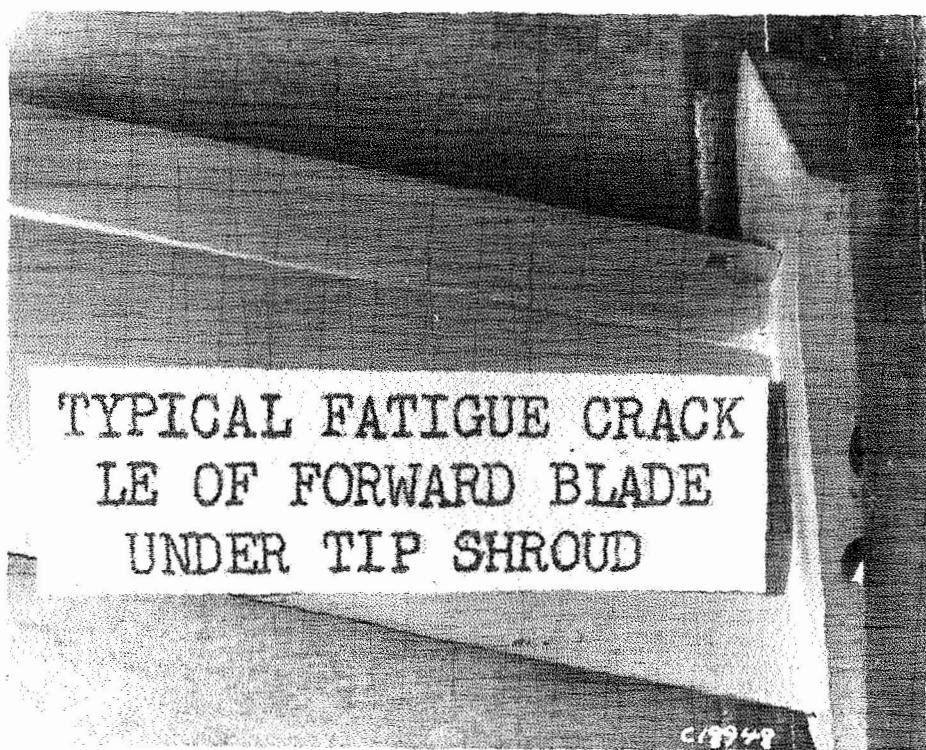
Fatigue Endurance Test Blade Failure,
